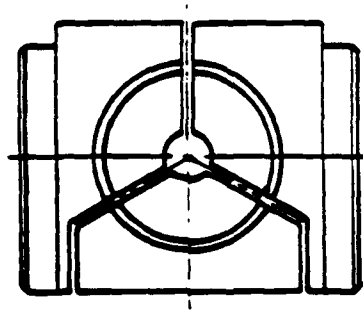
Three Die Radial Forging Machine (Ref. 4).
